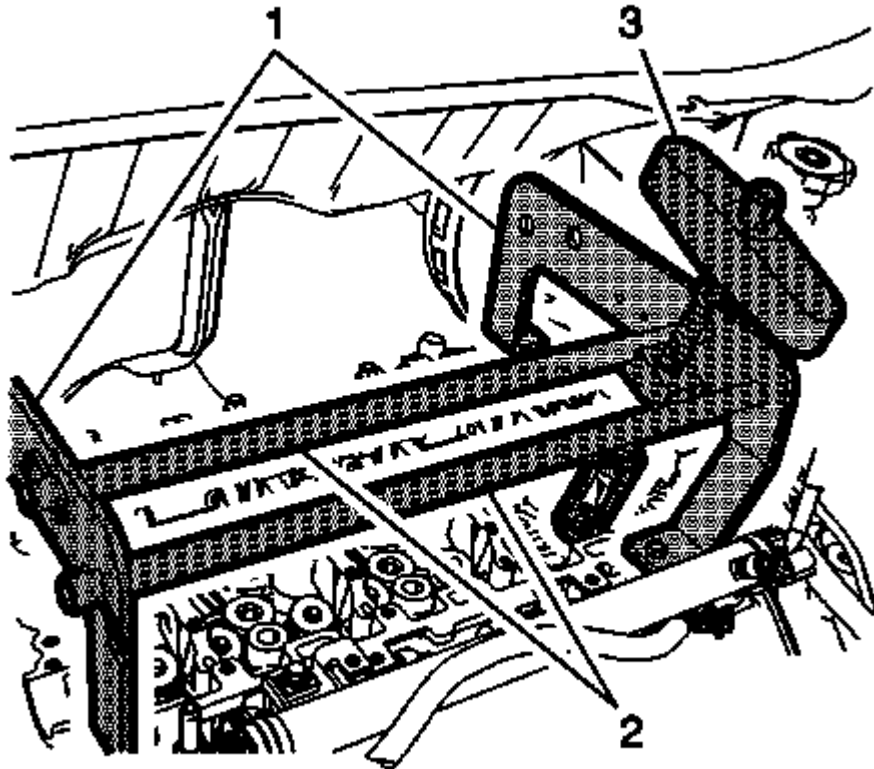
View Of Valve Spring Compressor Adaptor Set
